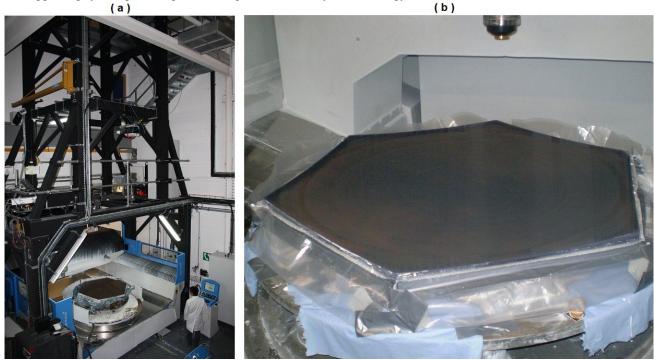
(a): A full-size segment in Zeeko IRP 2400 machine with optical test tower. (b): A test segment of 1 meter in process.
